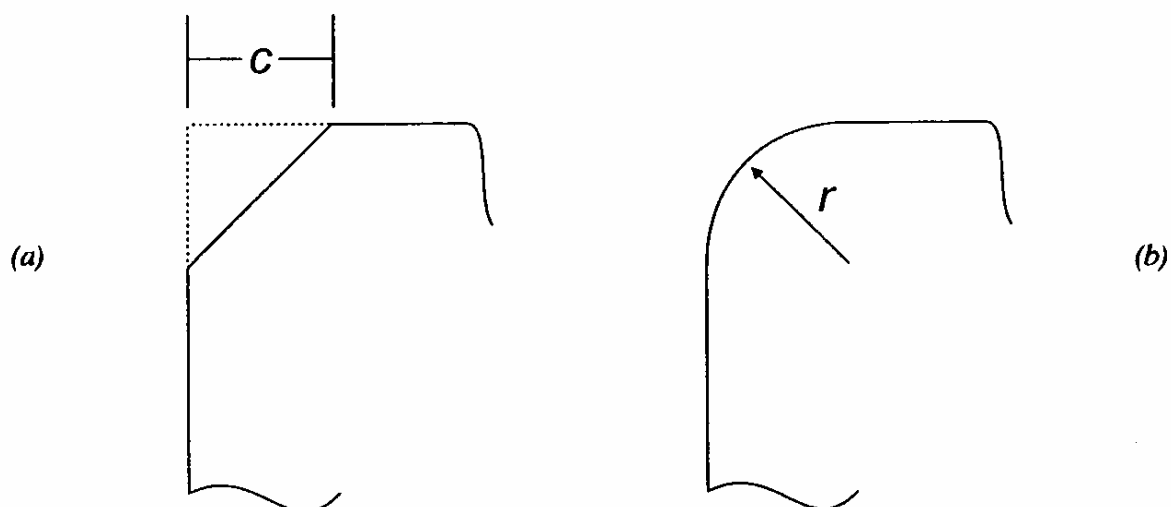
(a) 45° flat chamfer (size c) or (b) rounded chamfer (radius r) on test-pieces. If only two edges are chamfered, these should be the edges subjected to tensile stress.
